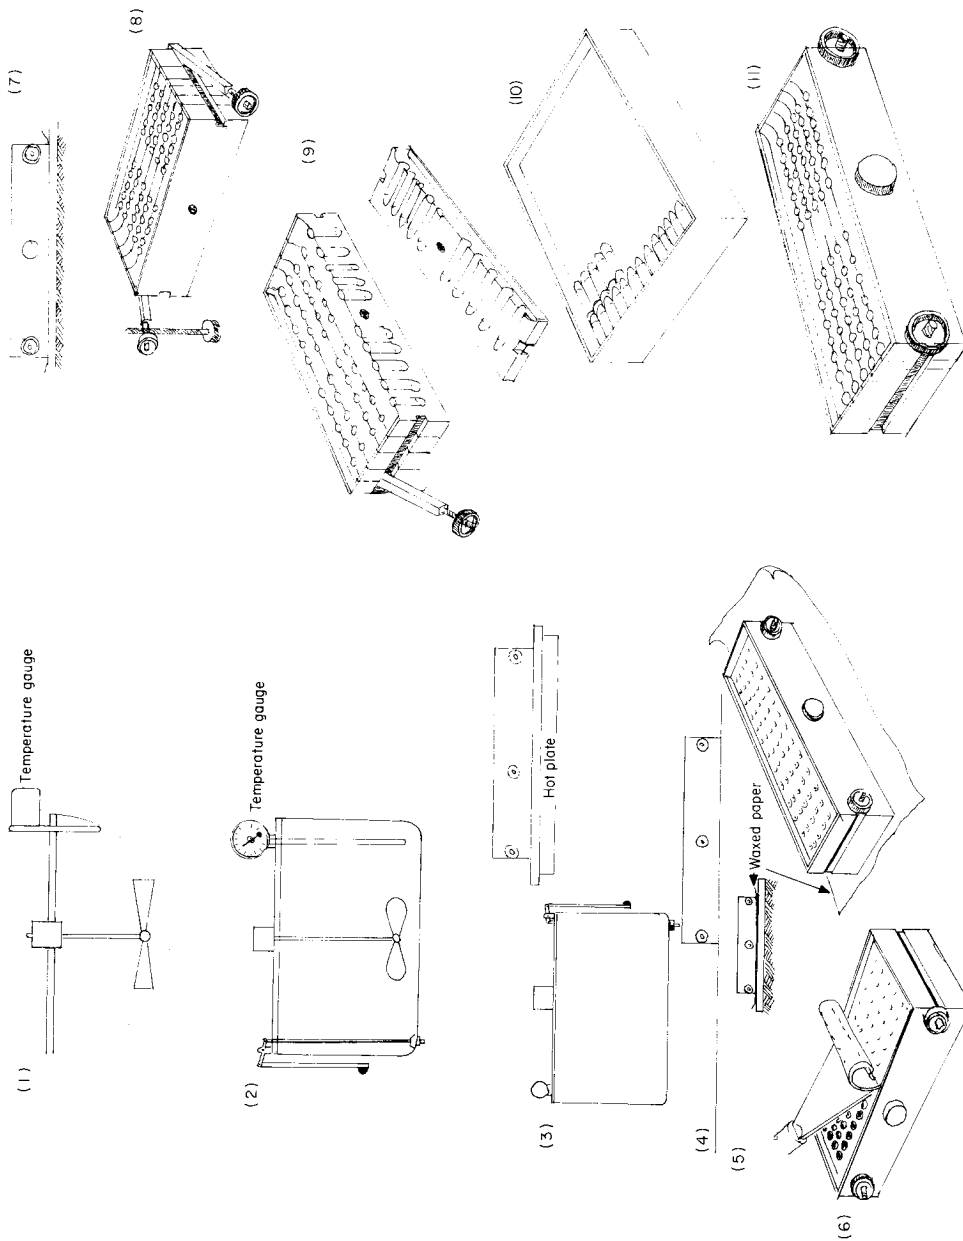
Split moulding of lipsticks. (1) Premelt lipstick in steam pan. (2) Fill dispenser. (3) Warm pre-oiled mould on hotplate. (4) Fill mould. (5) Allow mould to chill on cold plate. (6) Once surface has dimpled, remove top with scraper. (7) Replace mould on cold plate for final chilling. (8) Open mould. (9) Strip out bullets. (10) Examine sticks, reject poor moulds and pack acceptable sticks into tins. (11) Reassemble mould, oil with release agent. Return to (3) and recommence process.
